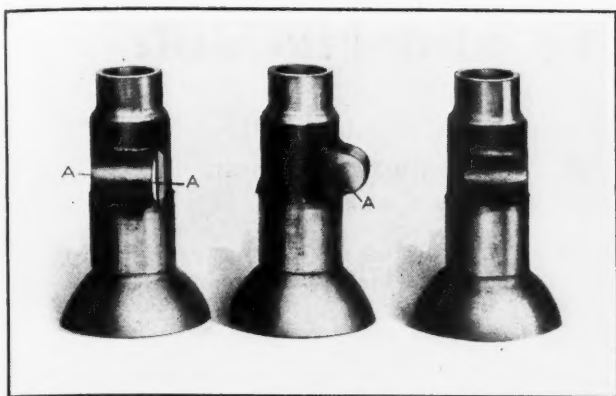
Universal Joint Housings Milled on Faces A in the Set-up Shown in Fig. 4
